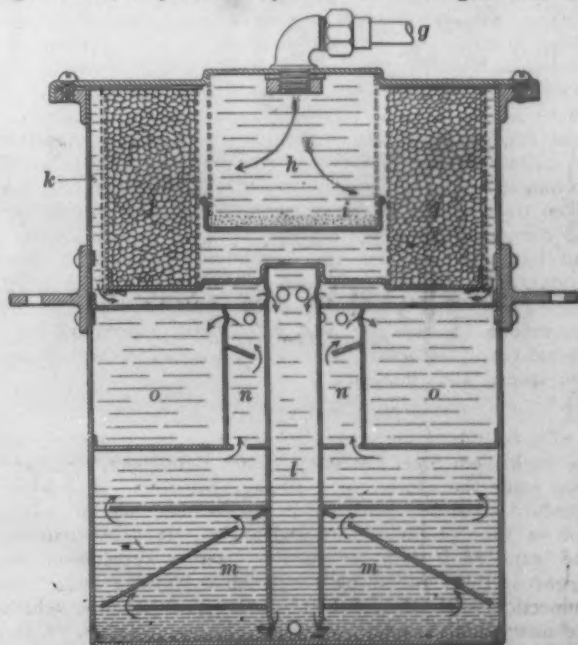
Sectional Elevation of the Filter, Showing Constructional Details.
